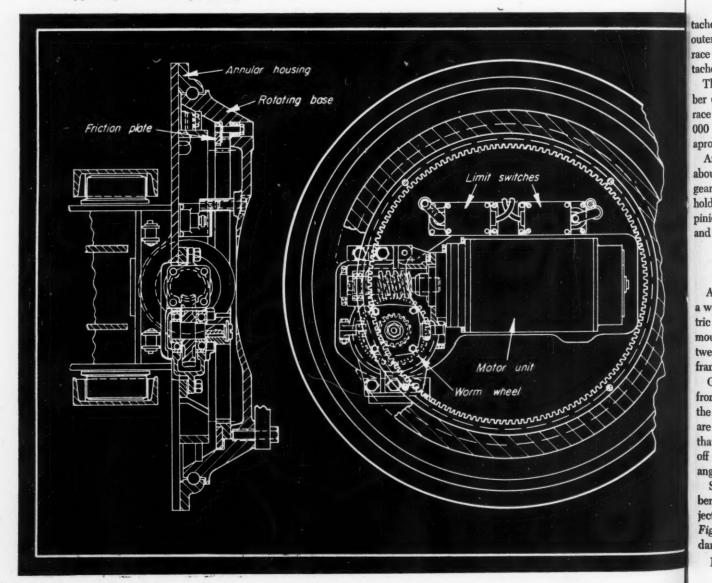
Cross-sertional view of revolving unit showing assembly of motorized drive inside the supporting and rotating housing 000 inch-pounds of torque on the rotating member.
